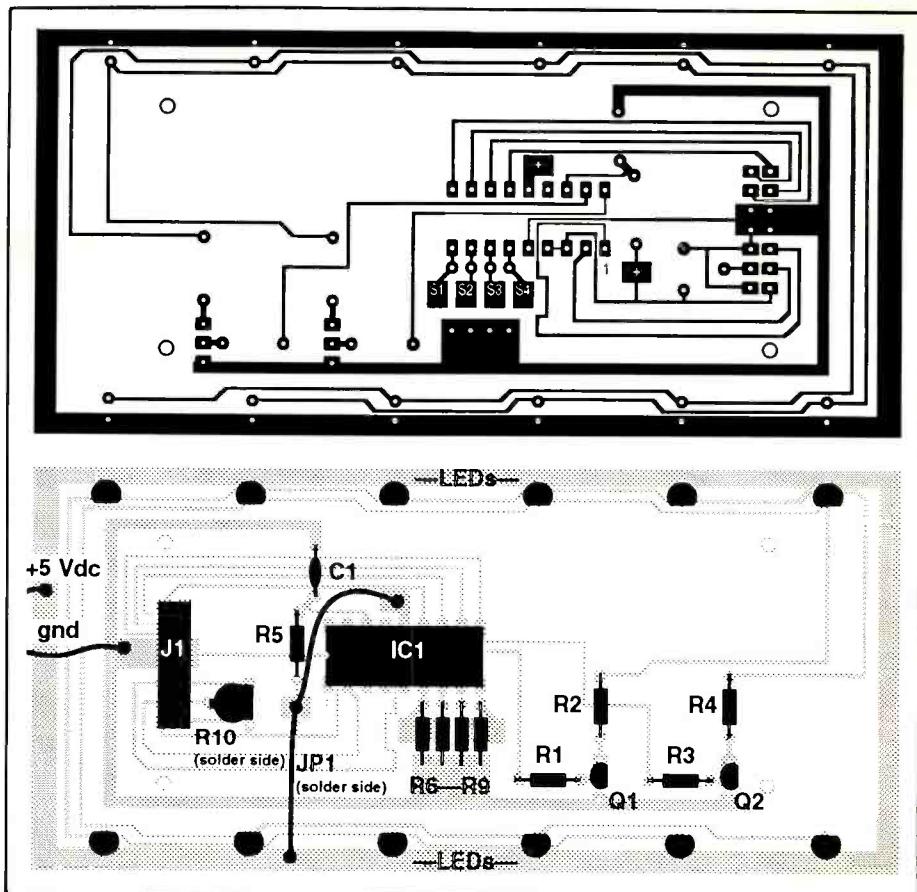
Actual-size etching-and-drilling guide (upper) and wiring diagram (lower) for project's printed-circuit board.
